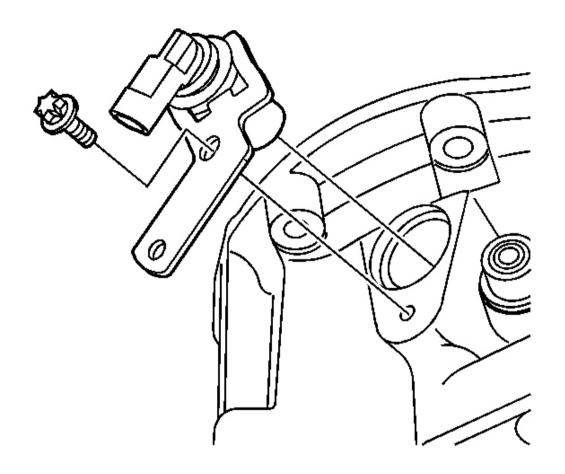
View Of VSS Courtesy of GENERAL MOTORS CORP.
